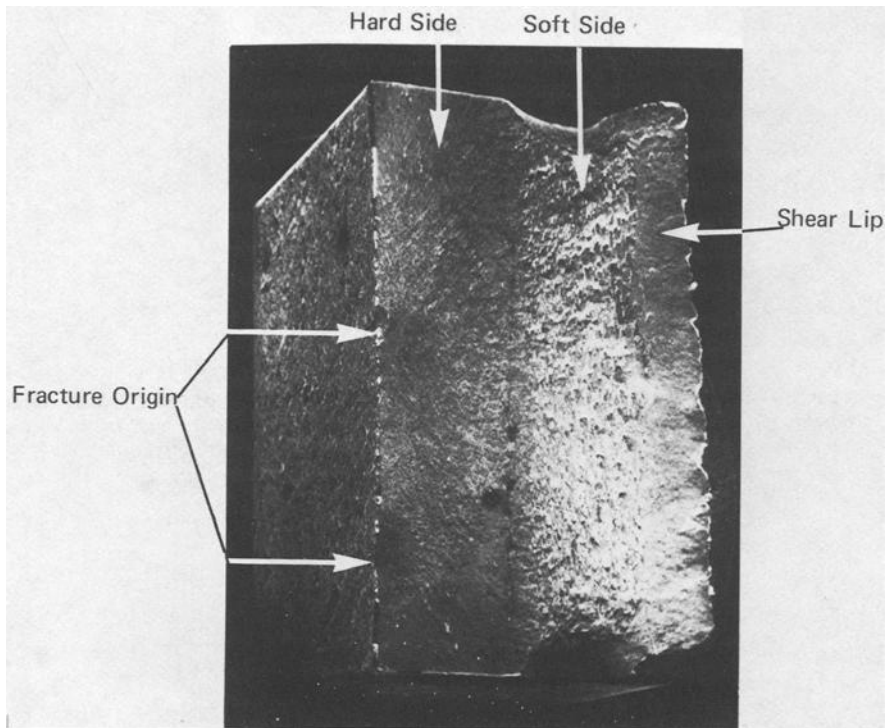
Scanning electron microscope fractograph of smooth fatigue specimen (air melted material) with as-received surface. Note multiple crack initiation sites on hard side surface ($\times 5.6$).
